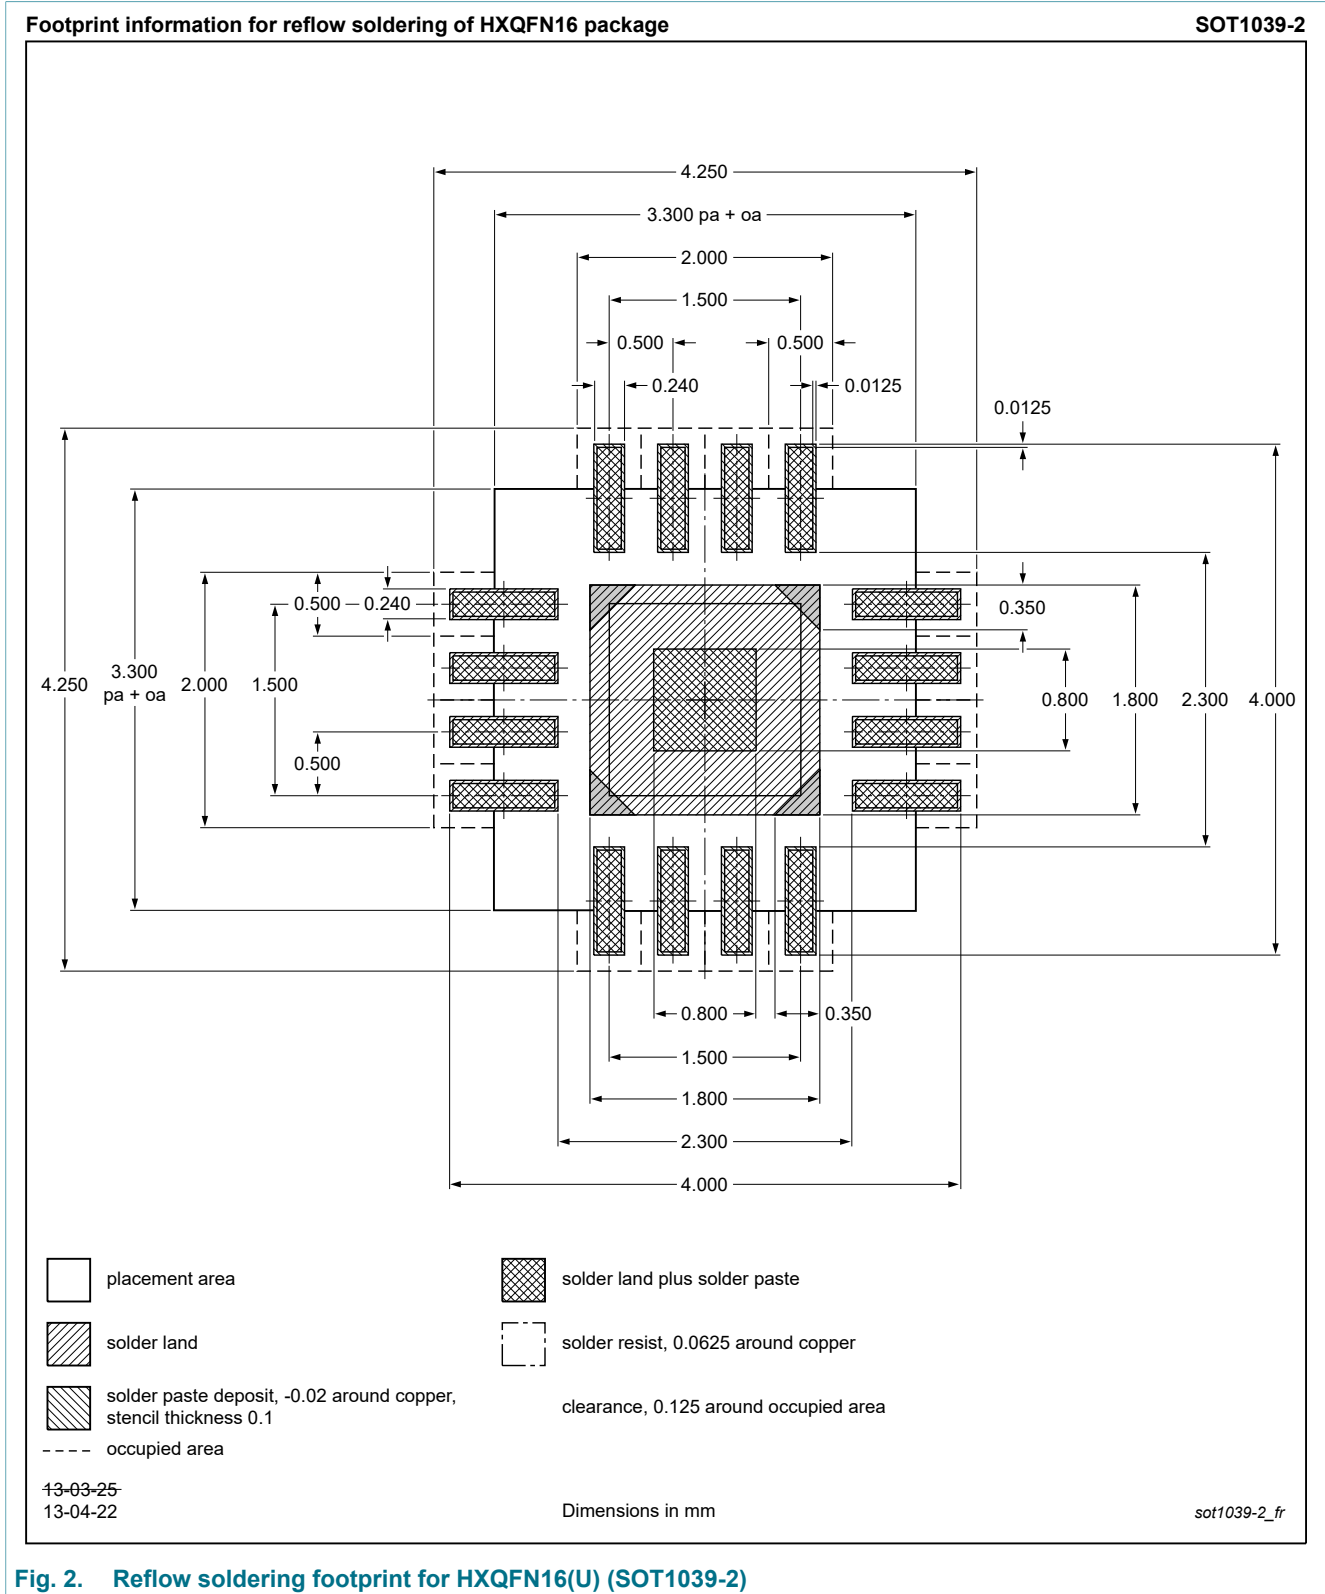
Reflow soldering footprint for HXQFN16(U) (SOT1039-2)
